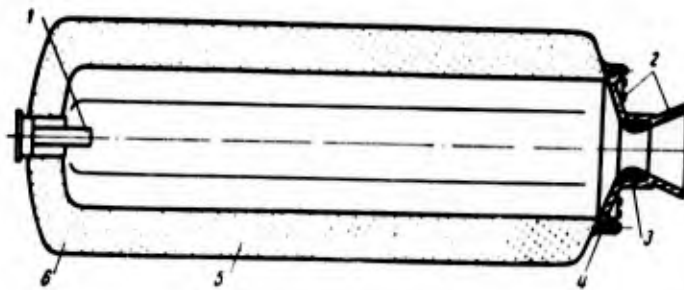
Modern rocket engine with mixed solid fuel cast into combustion chamber (specific impulse 223 sec). 1) Igniter; 2) heat-resistant nozzle; 3) heat-resistant nozzle liner; 4) joint between chamber and nozzle unit; 5) cast charge; 6) combustion-chamber shell.
